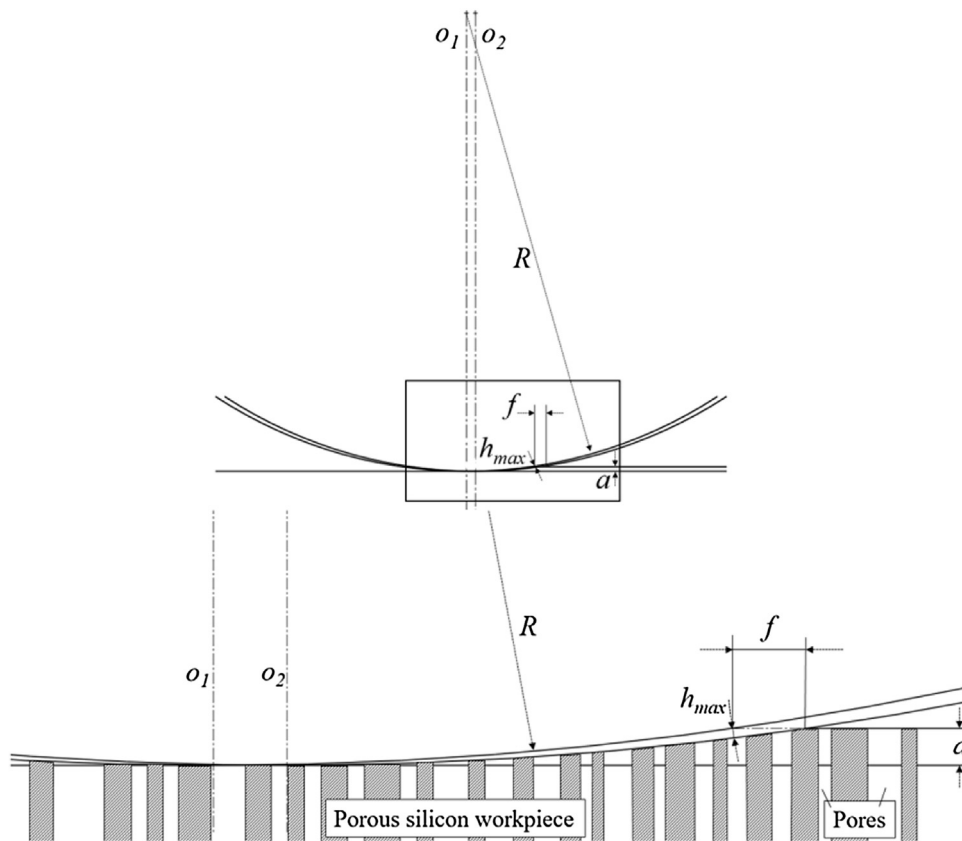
Cutting model for porous silicon using a round-nosed tool.
